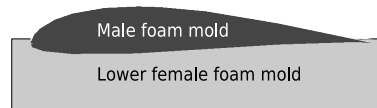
Side view of the mold assembly after the upper female foam mold is removed.
